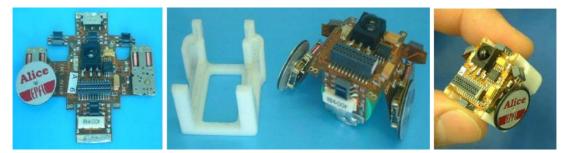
Manufacturing and assembly techniques of Alices [28].
